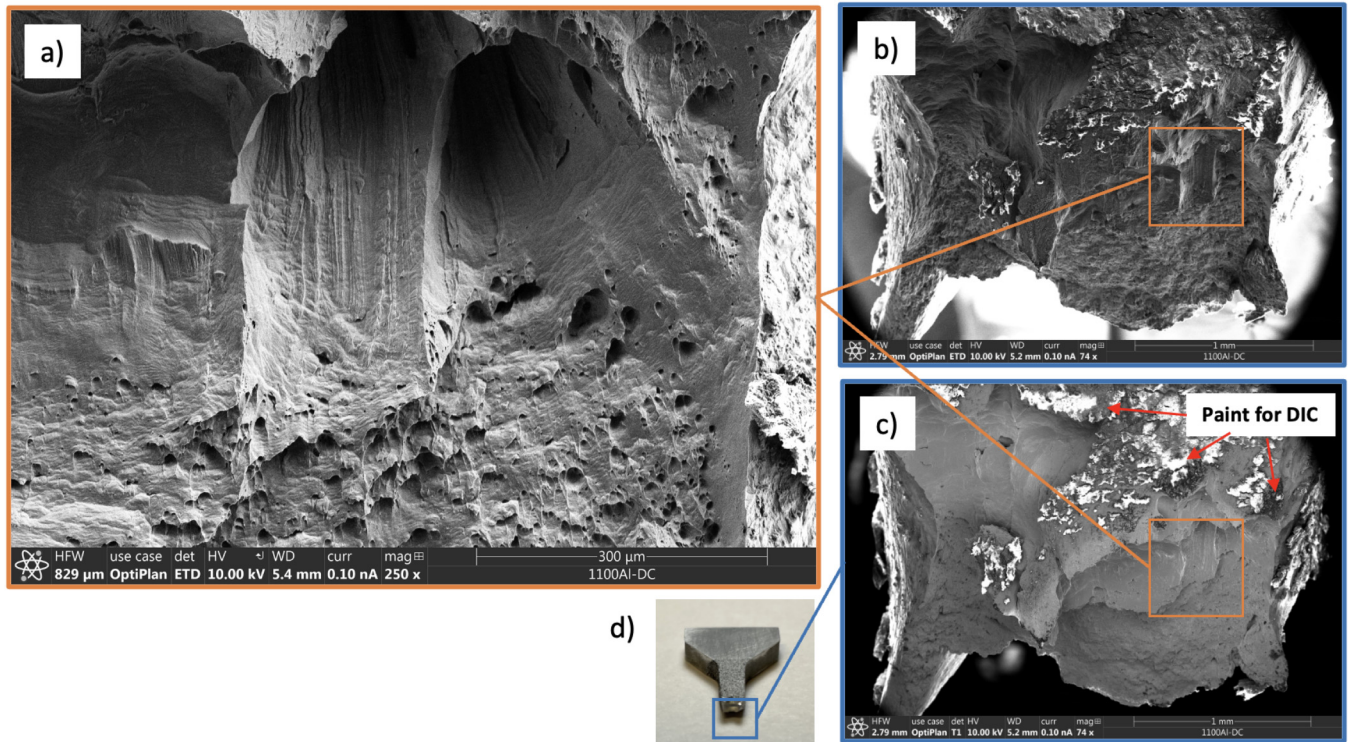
Scanning electron microscopy of the fracture surface of the dogbone sample DC (1000 μm scratch depth with repair) after quasi-static loading. Detail view (a) shows the closeup of the key fracture surface where the repair region is roughly at the top half of the image and the original material is roughly at the bottom half: the original material shows evidence of highly ductile fracture, while the repair shows more brittle characteristics and large smoother regions. The intermediate zoom views in (b) and (c) show two angles, which both include the zoom view in (a) but also show the context within the entire sample, and the photo in (d) shows the reference location in the entire half of the original dogbone.
